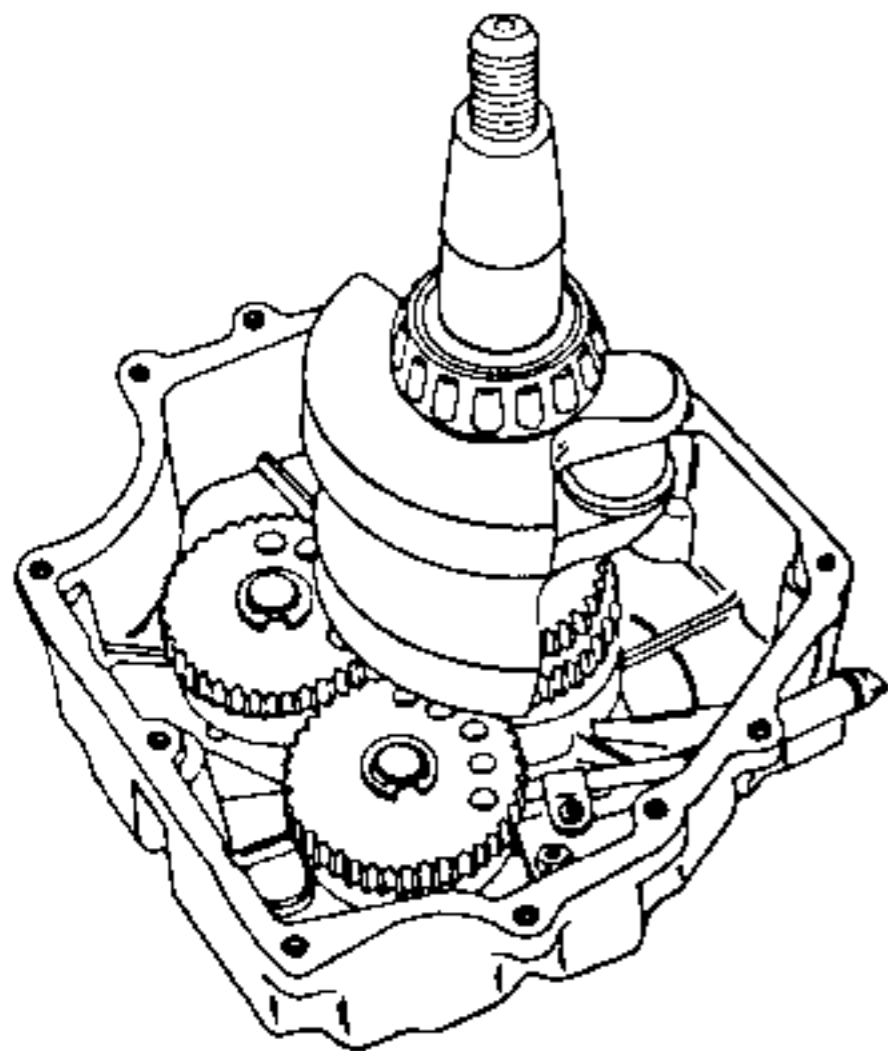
View showing Dyna-Static balancer gears installed in crankcase cover. Note gear retaining snap rings.
